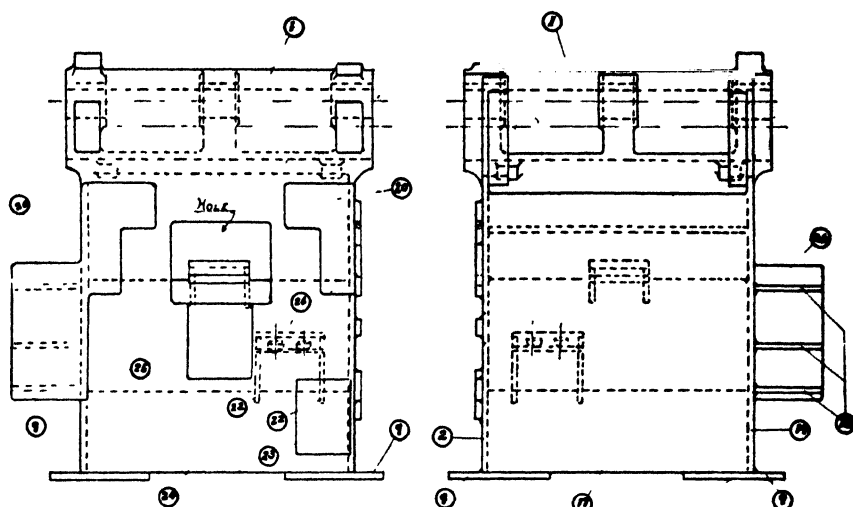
Front (left) and rear views, welded steel construction.
